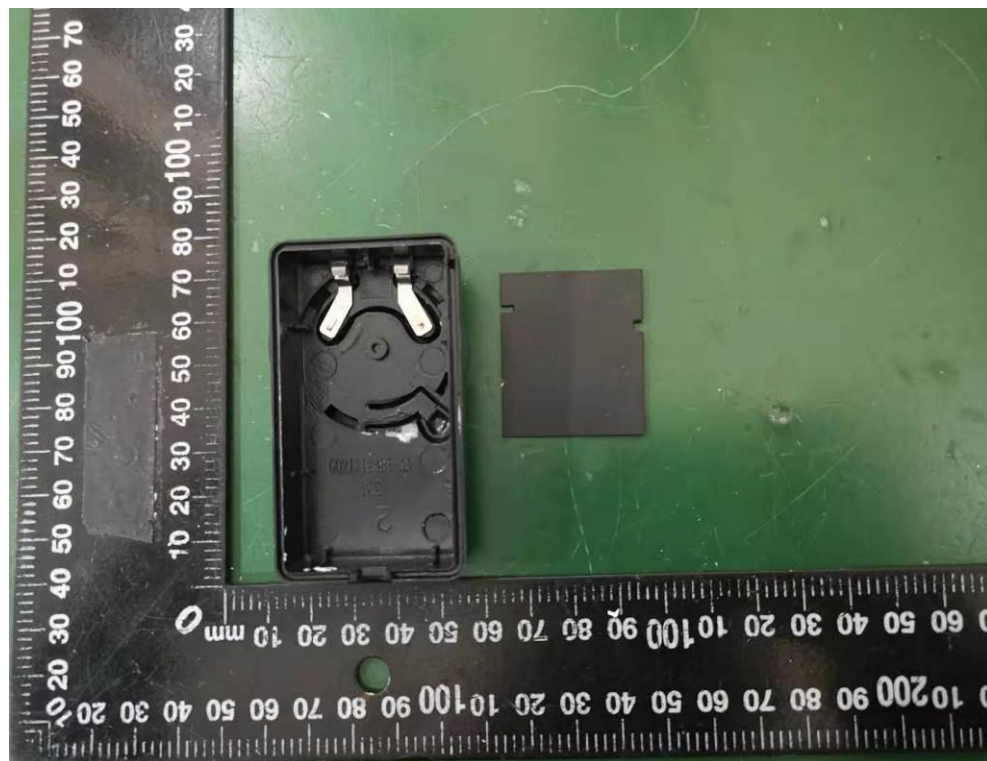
Inside view of unit for model ZL-024WLxxxxyyyXX02
